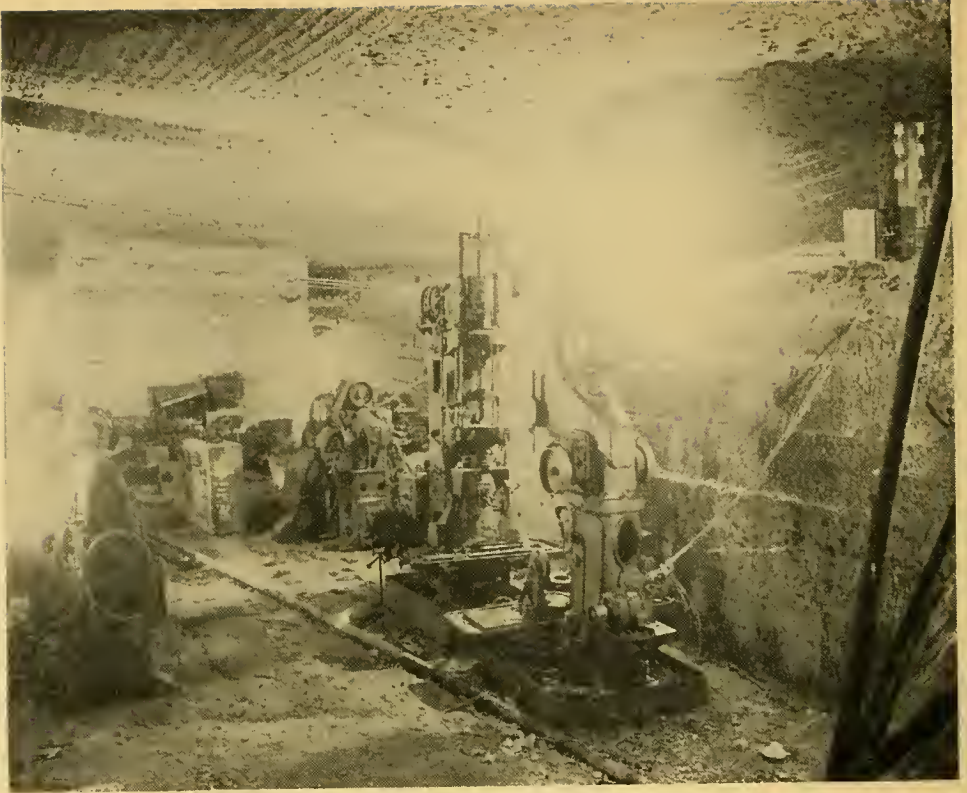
Cylinder barrel shop, Tomura plant at Oya Works.
